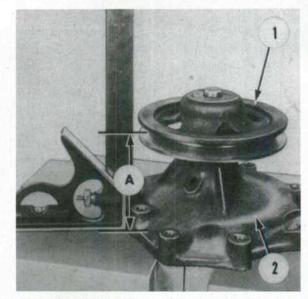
Press pulley (1) onto pump shaft until distance (A) from center of pulley V-groove to rear face of housing (2) is 3-3/8 inches (86 mm).
